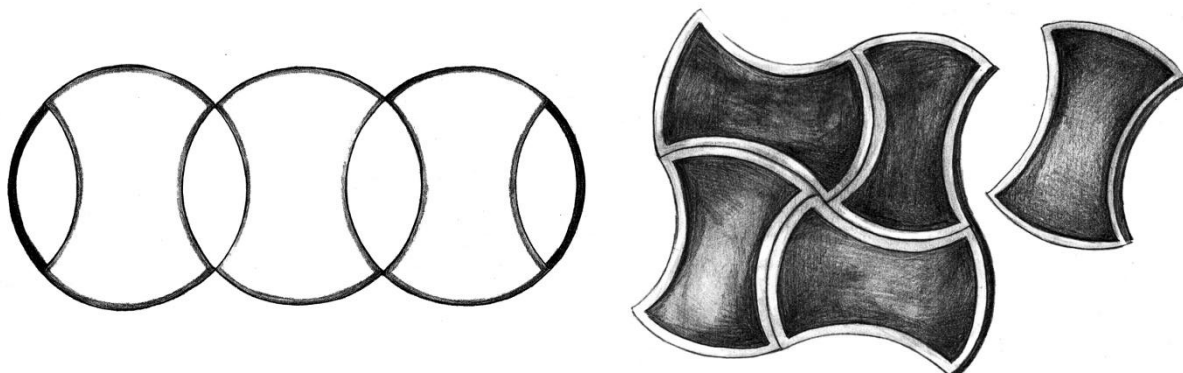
Example tile moulds. Tile moulds can be many different shapes, provided the tiles fit together with no gaps. This mould (left, above) produces 3 tiles with the shape illustrated on the right. It is made by cutting and welding three rings.
